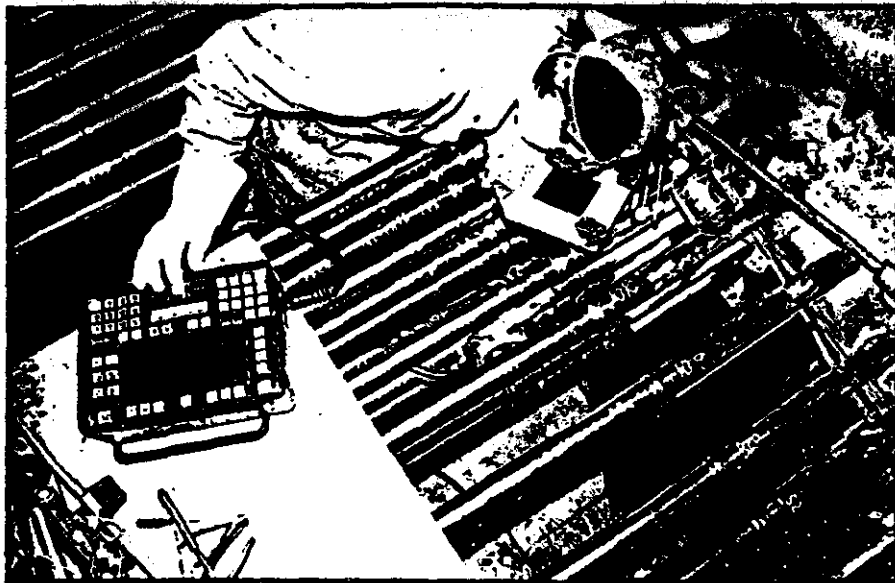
An orbital welding machine operator uses a program operator pendant to adjust the position of the weld head in preparation for welding the superheater header tube. Note the finished chromium-molybdenum-to-chromium-molybdenum welds and the layered arrangement of the tubing entering the superheater header.
